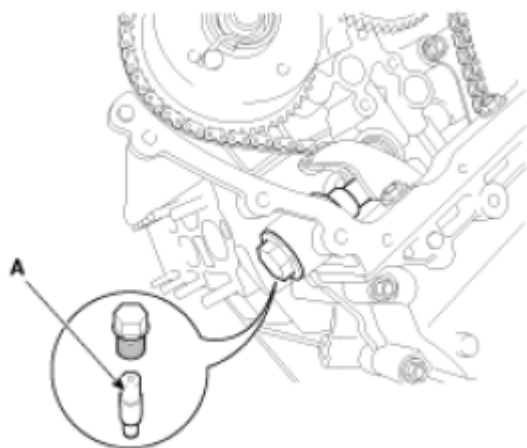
Identifying Timing Chain Tensioner And Chain Guide Fixing Bolt
